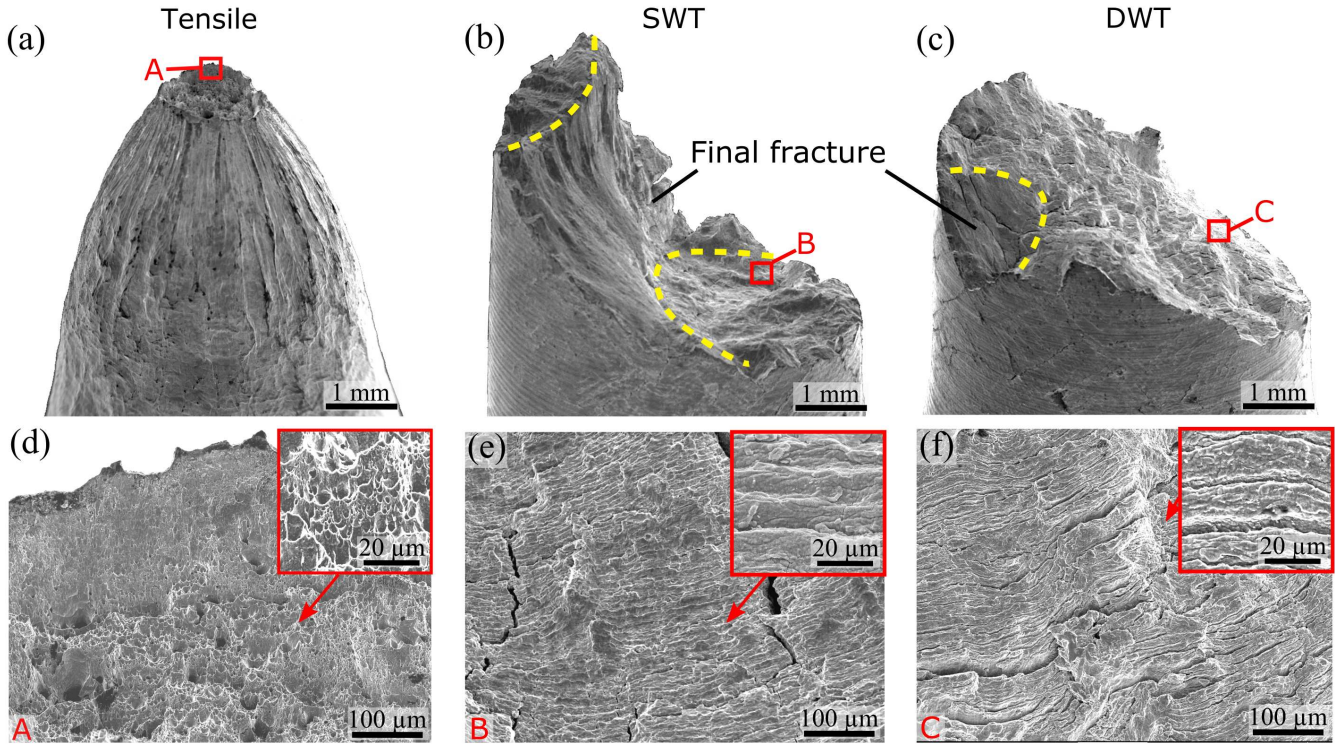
SEM micrographs of fractured samples (a-c) for FV566 steel tested at 600°C under tensile, saw-tooth and dwell-type loadings showing crack propagation, final fracture areas, and closer details (d-f) of the surface features and markings.
